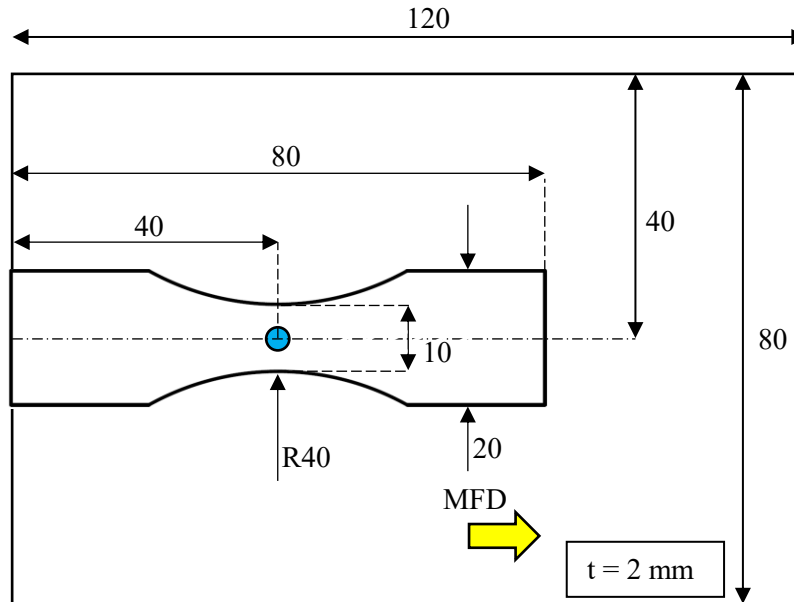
Gemetry P/B. Specimen and plate dimensions.
